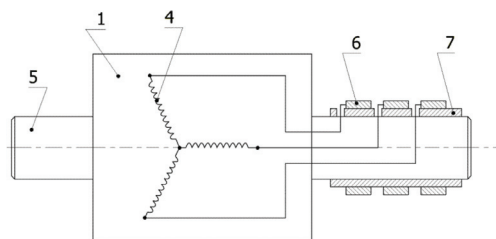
Star arrangement of the rotor winding, winding ends are connected to slip-rings [1]
